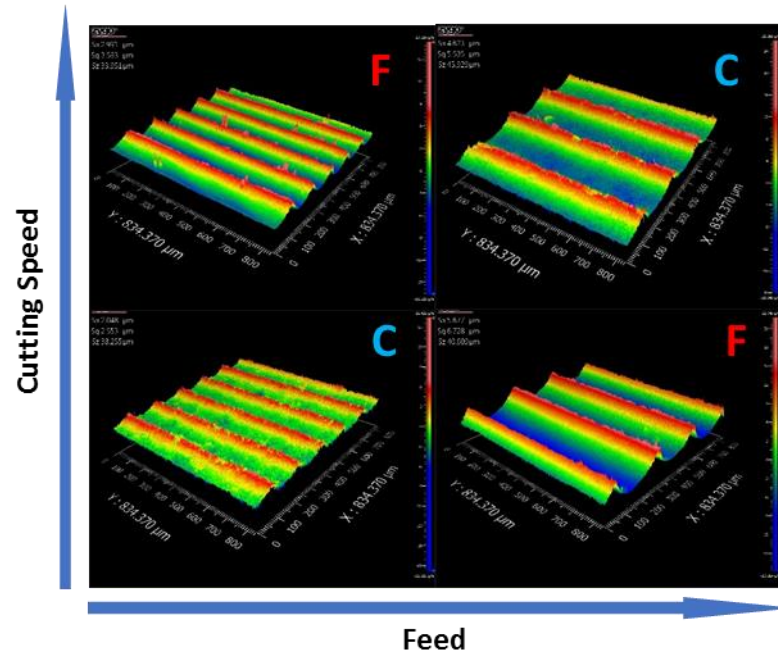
Interferometer images of samples machined with 0 degree rake angle tool and HMC binder.
